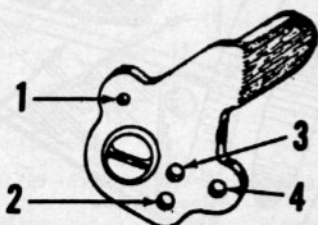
View showing throttle shaft arm typical of all carburetors. It is important that throttle opening or governor spring and/or link be hooked into proper hole. Refer also to Fig. HL211.
